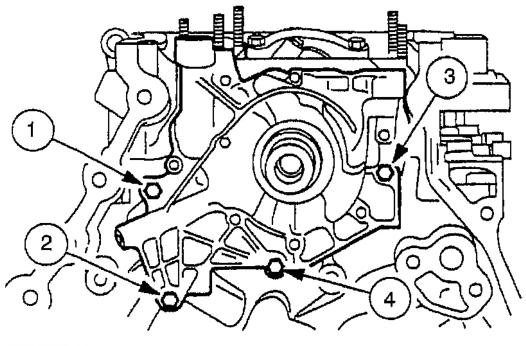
Disassembling Cylinder Block (I) Courtesy of MAZDA MOTORS CORP.
